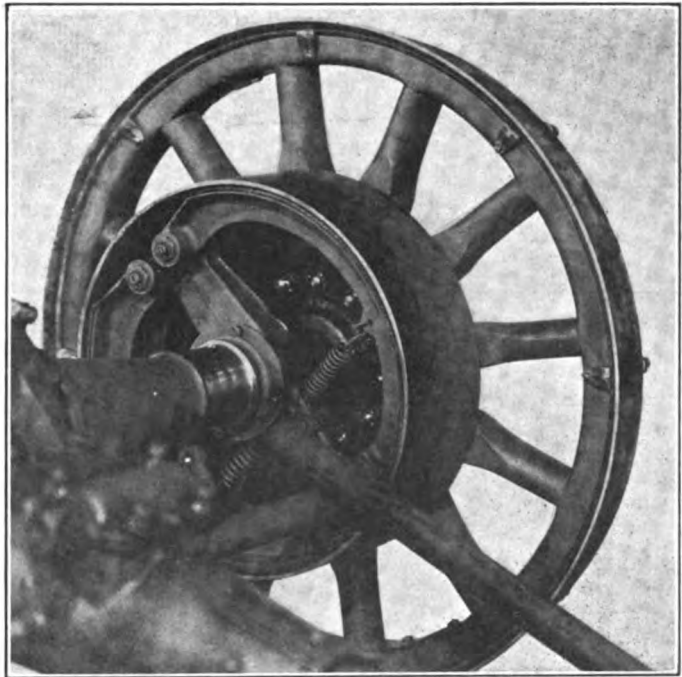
Rear brake drum, wheel, and details of holding brake mechanism
